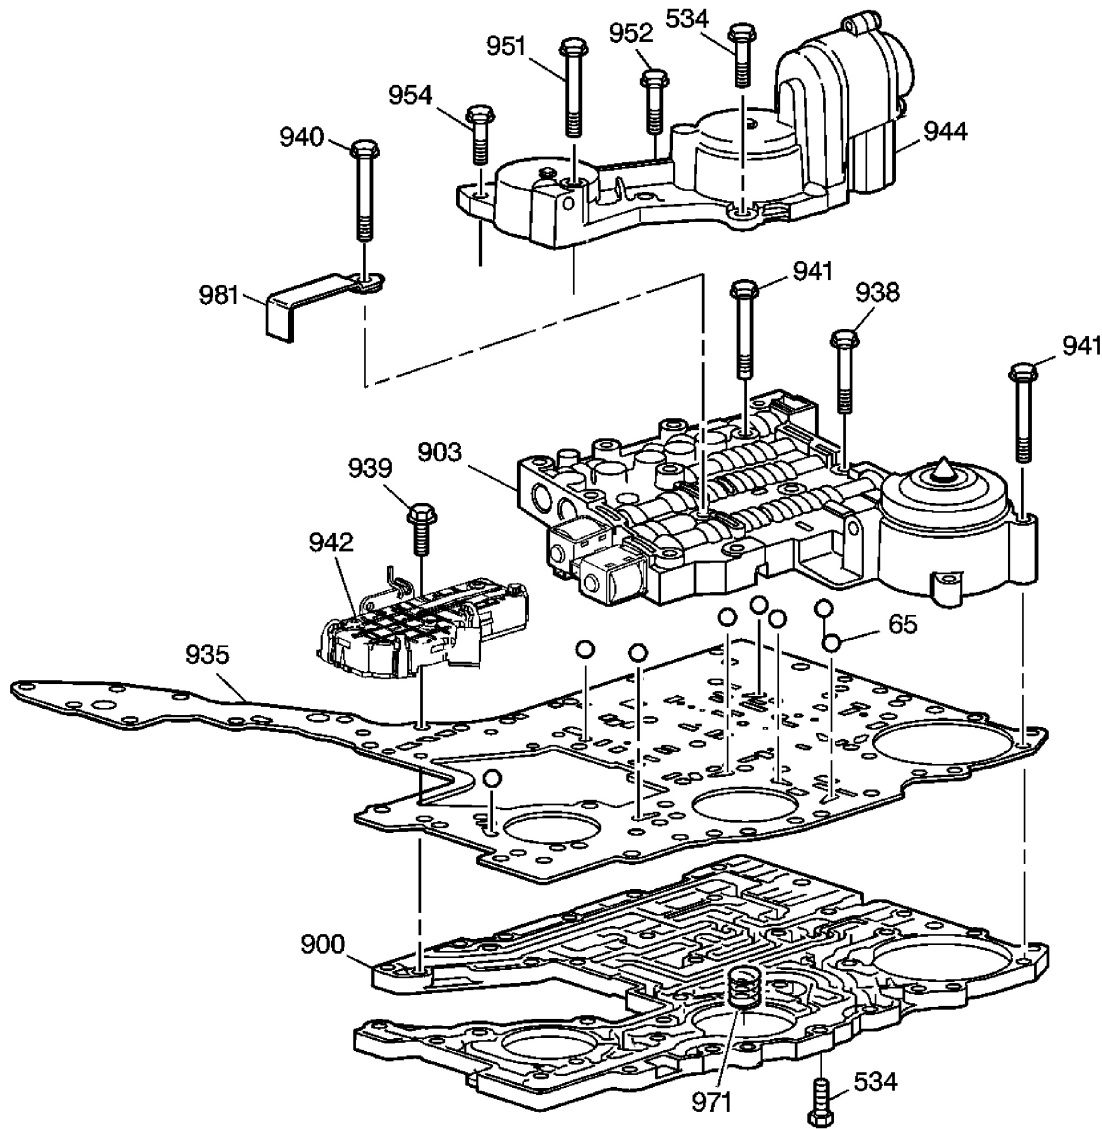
Lower Channel Plate, Control Valve Body and Accumulator Housing Assembly
